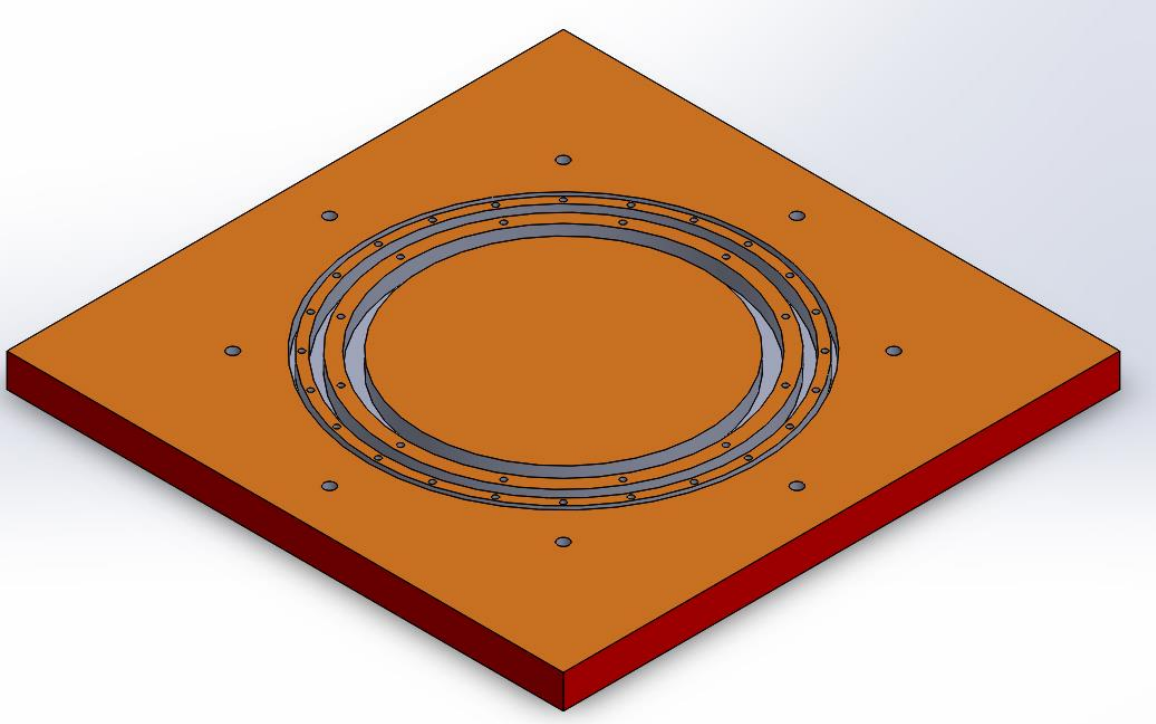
CAD model of acrylic sheet end plate (Appendix E)
